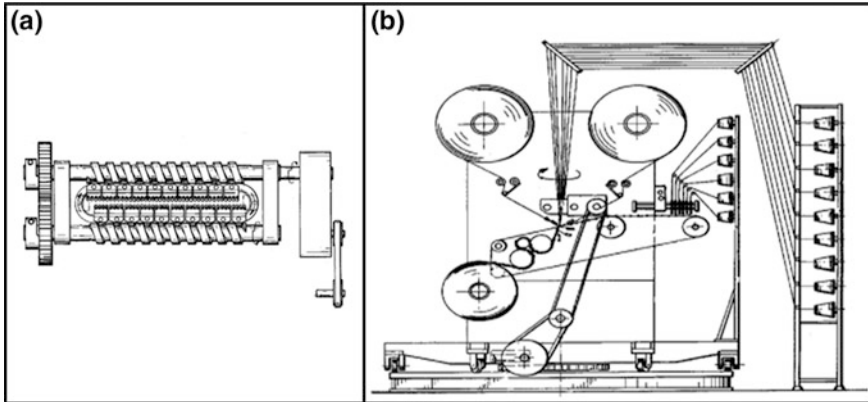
a Bias indexing mechanism. b Warp knitting machine [62]
